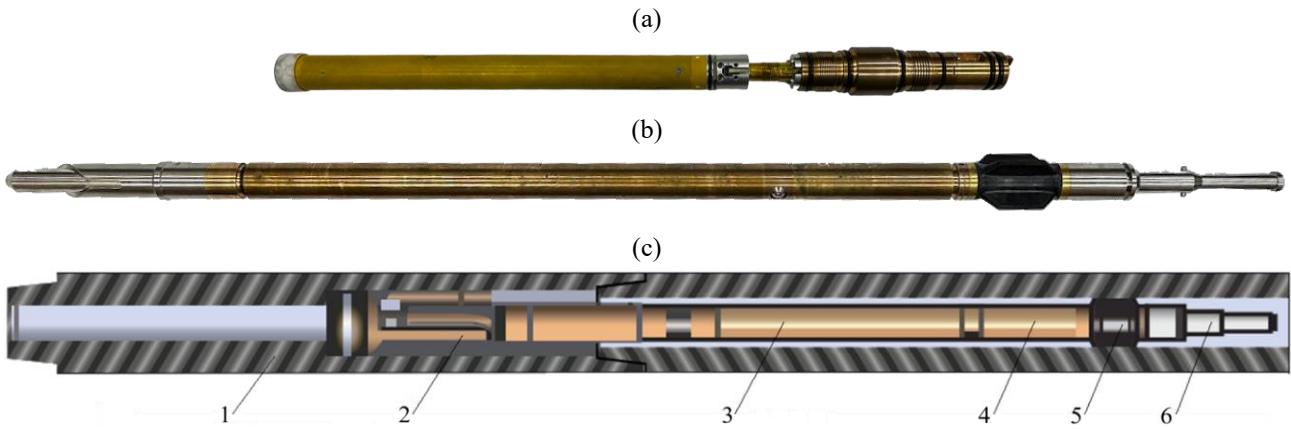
Module for housing the vibration controller board and power battery in the BHA: (a) vibration controller with power battery before installation in the module; (b) sample of assembled module; (c) schematic of module installation in the drill string; 1 – landing sub; 2 – guide sleeve; 3 – main housing with vibration controller; 4 – contact group housing; 5 – centralizer; 6 – fishing neck
